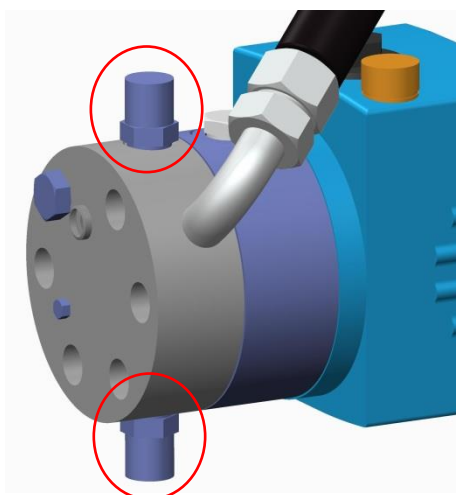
Tighten the inlet and outlet check valve housings slightly, circled in red, using an open ended wrench
